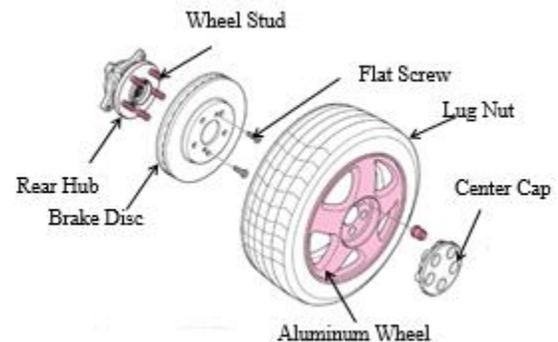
Aluminium Wheel is fastened to the Rear Hub with Steel Studs and Lug Nuts [16]
